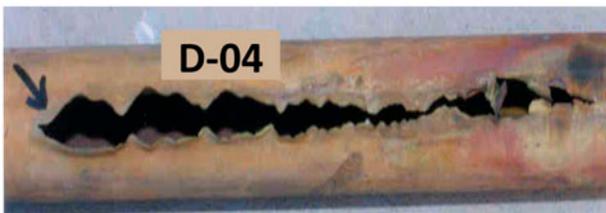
Tube D-04 showing rupture edges due to erosive thinning.
